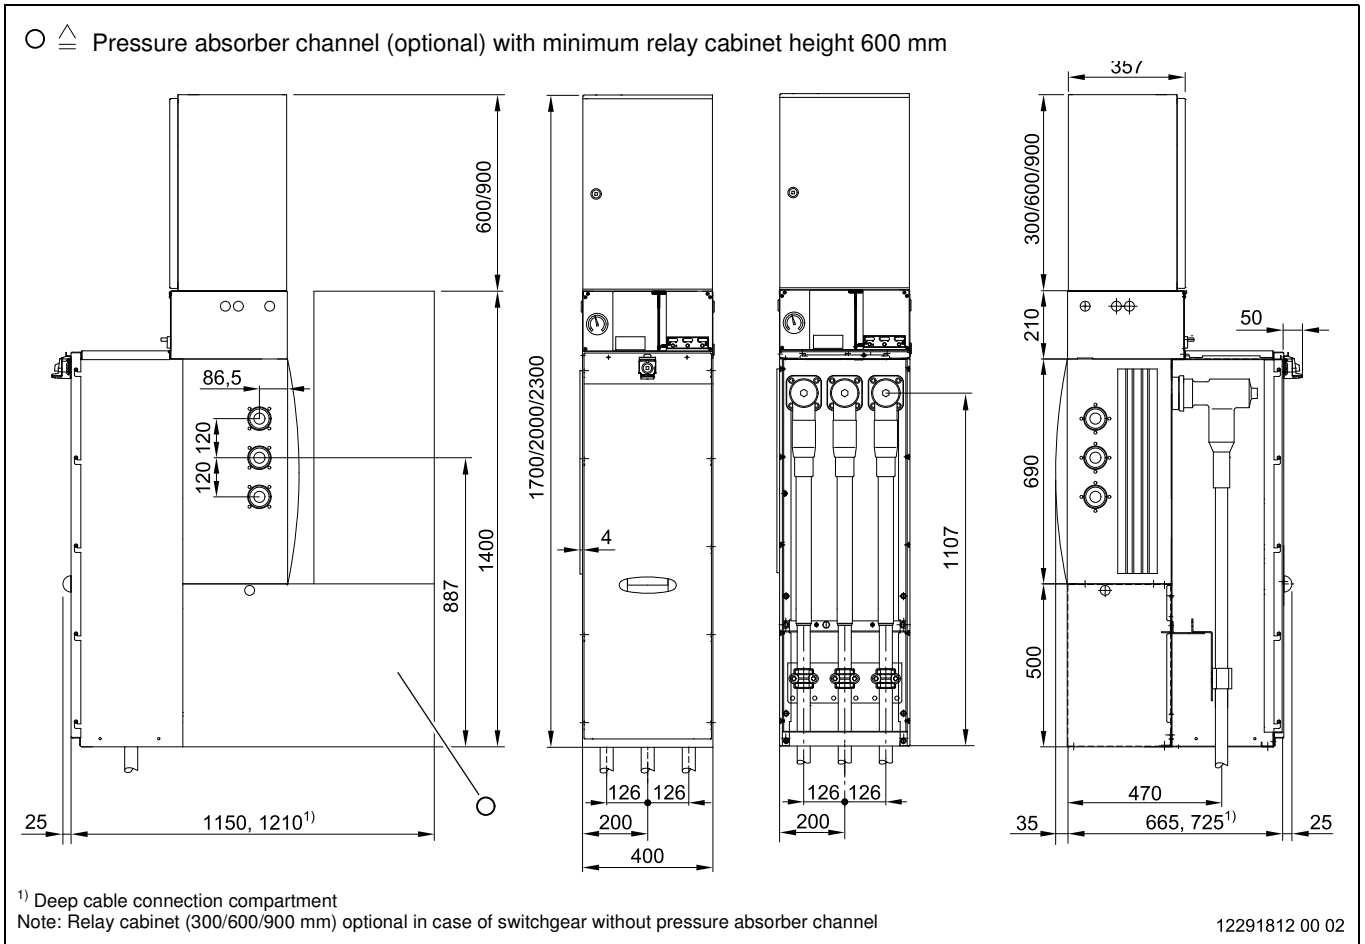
Cable connection panel GAE630 -1A1-/4/ (all dimensions are nominal dimensions [mm])
